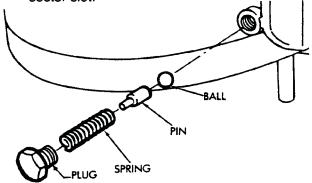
Remove Detent Plug, Spring, Pin and Ball
